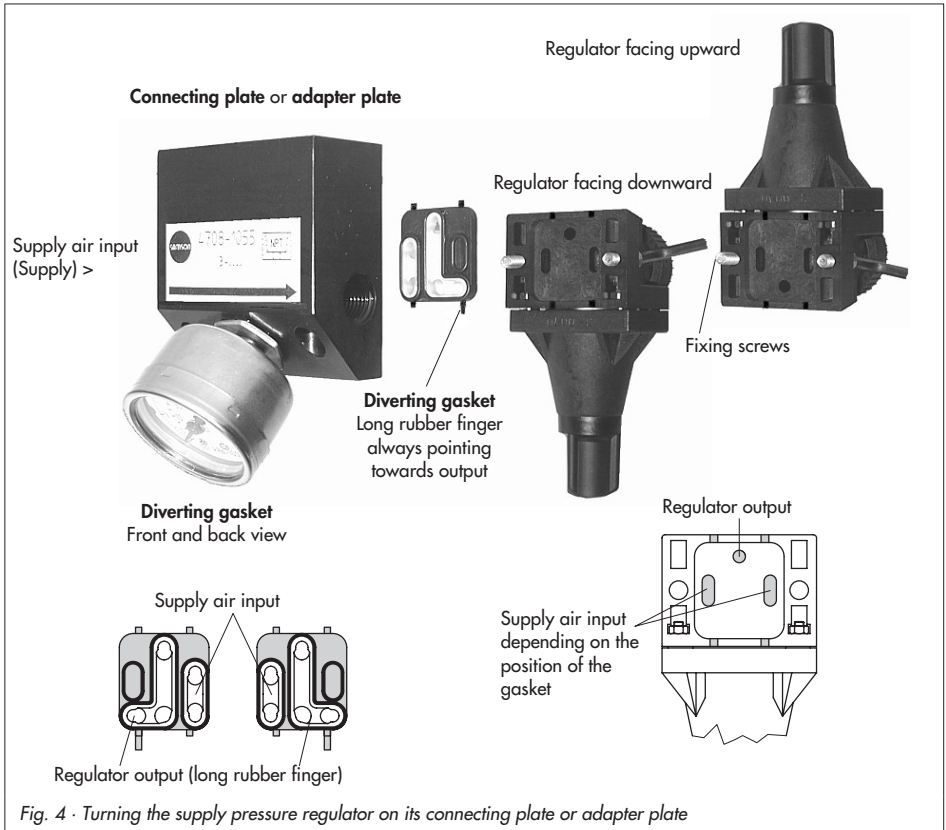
Turning the supply pressure regulator on its connecting plate or adapter plate
